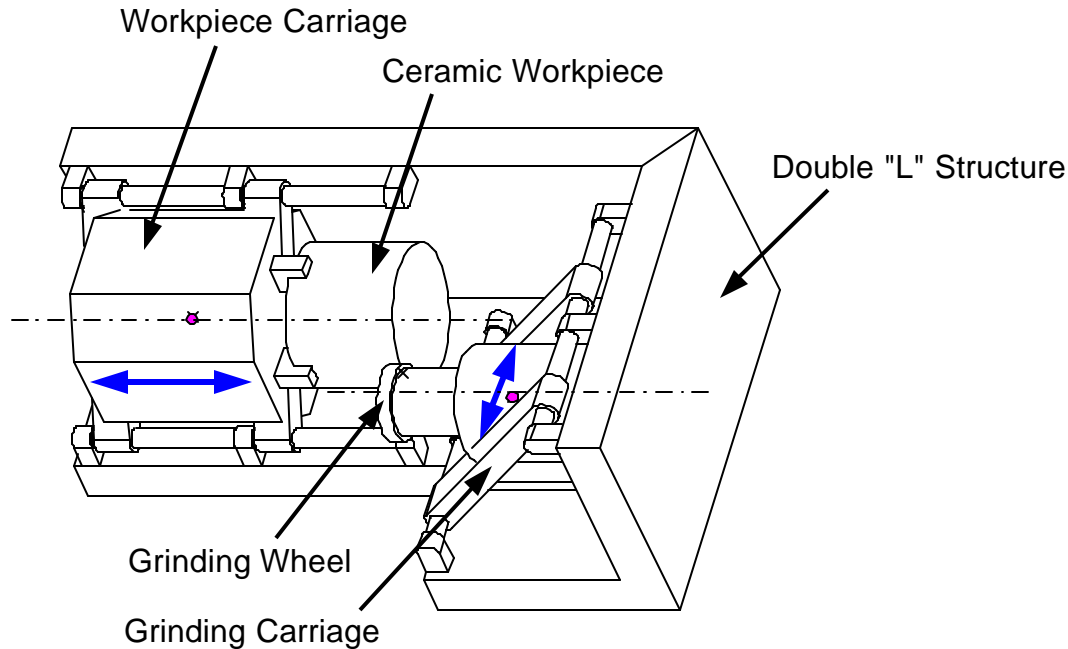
The basic layout for the Lathe. The purple dots are the center of motion for each the carriage, notice they pass through the rotational axes of the workpiece and grinding wheel.
